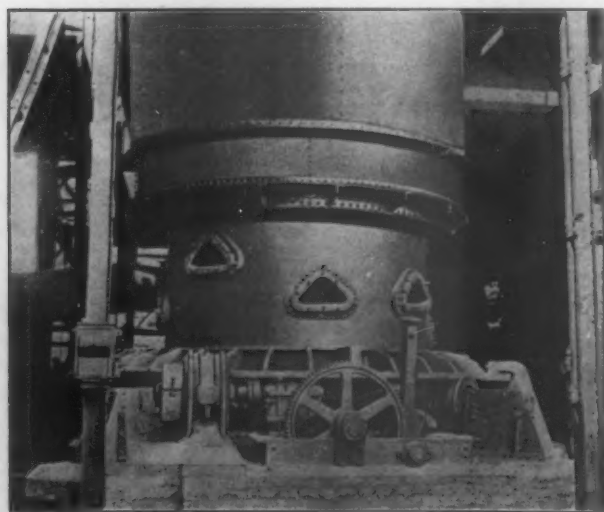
The Rotating Mechanism of the Küppers Gas Producer.
